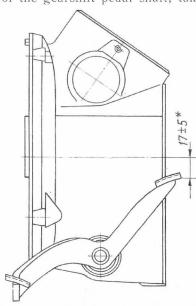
Fitting the gearshift pedal * To plane of shafts
